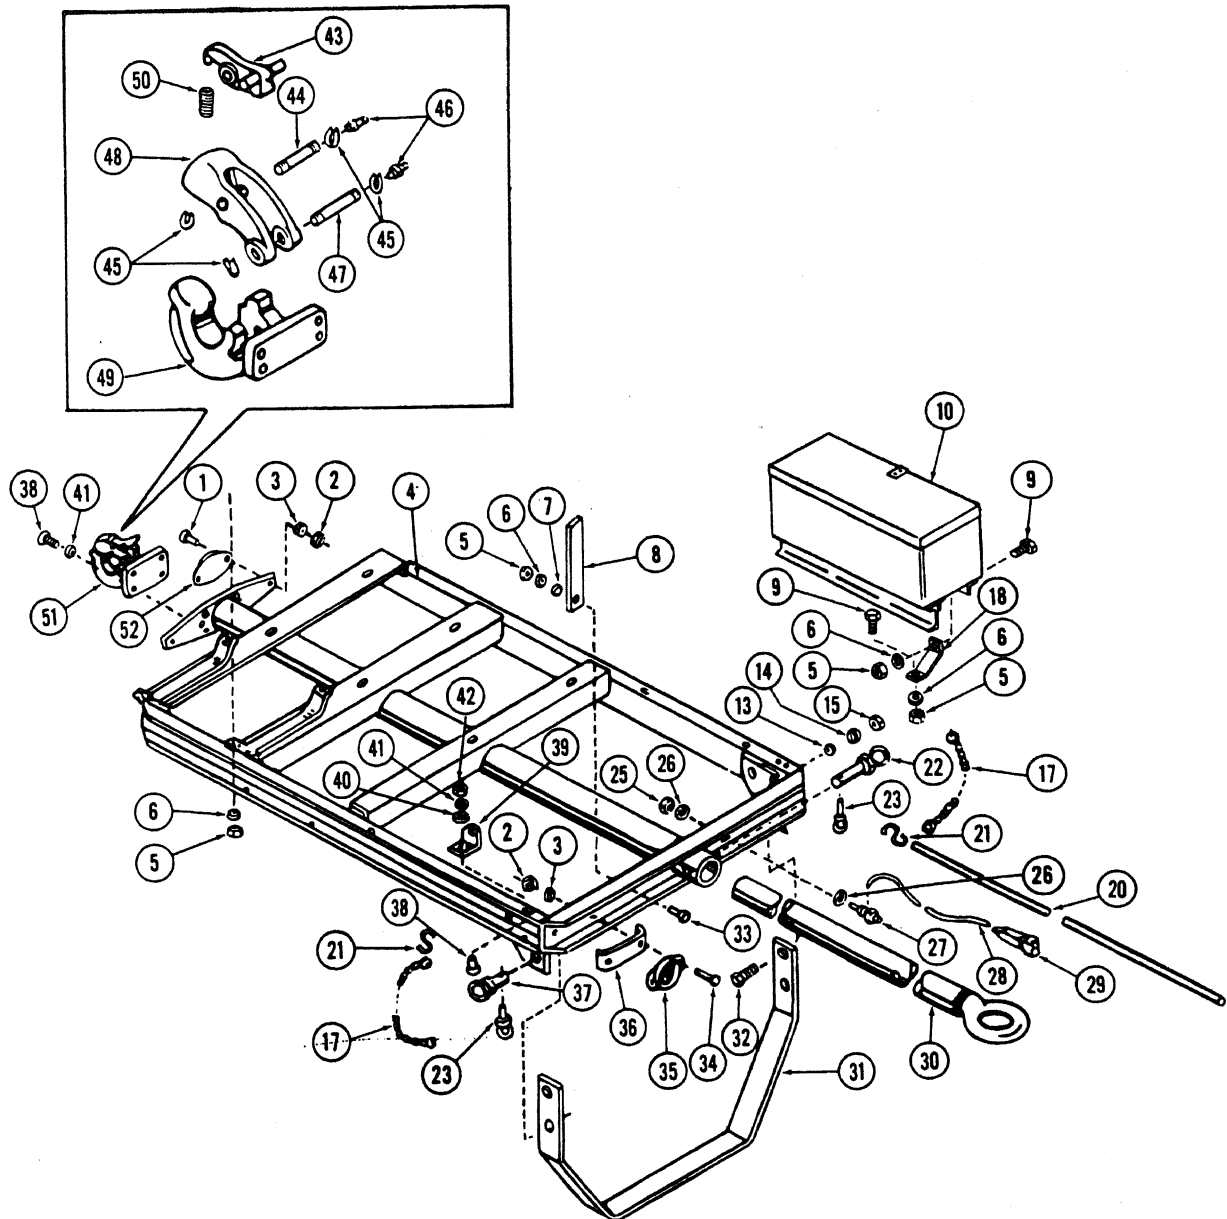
Pump, trailer, toolbox, towing eye and pintle hook, exploded view.
